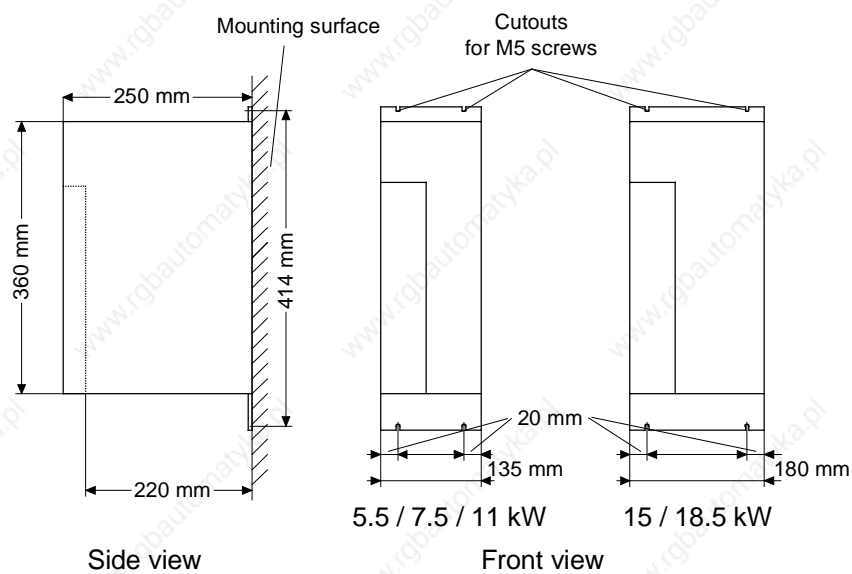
Dimension drawings for housings 135 mm and 180 mm wide
